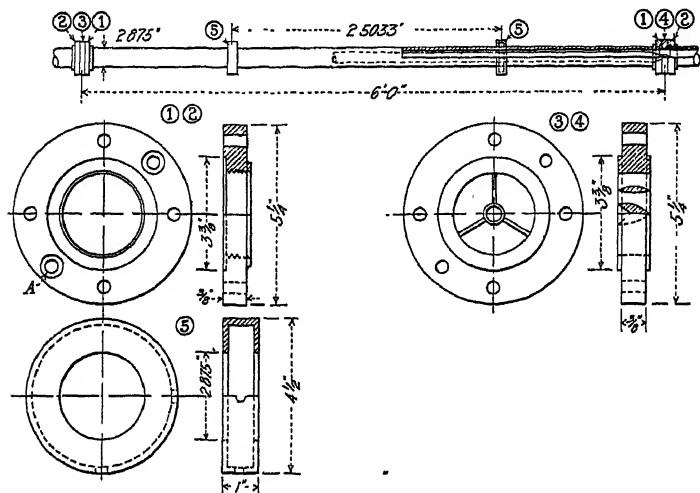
FLANGES, PIEZOMETER RINGS, AND TEST-PIPE ASSEMBLY
